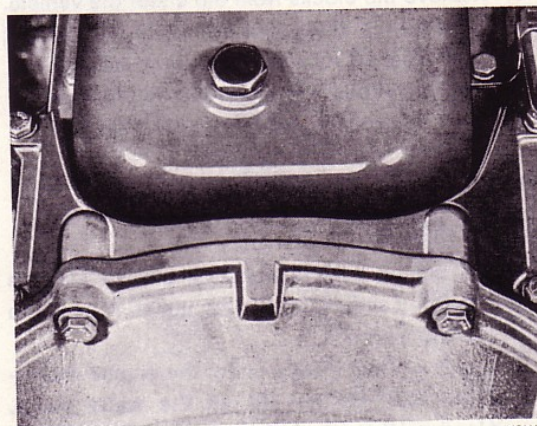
Reinforcing bracket, cylinder block-flywheel housing, type 2 engine
